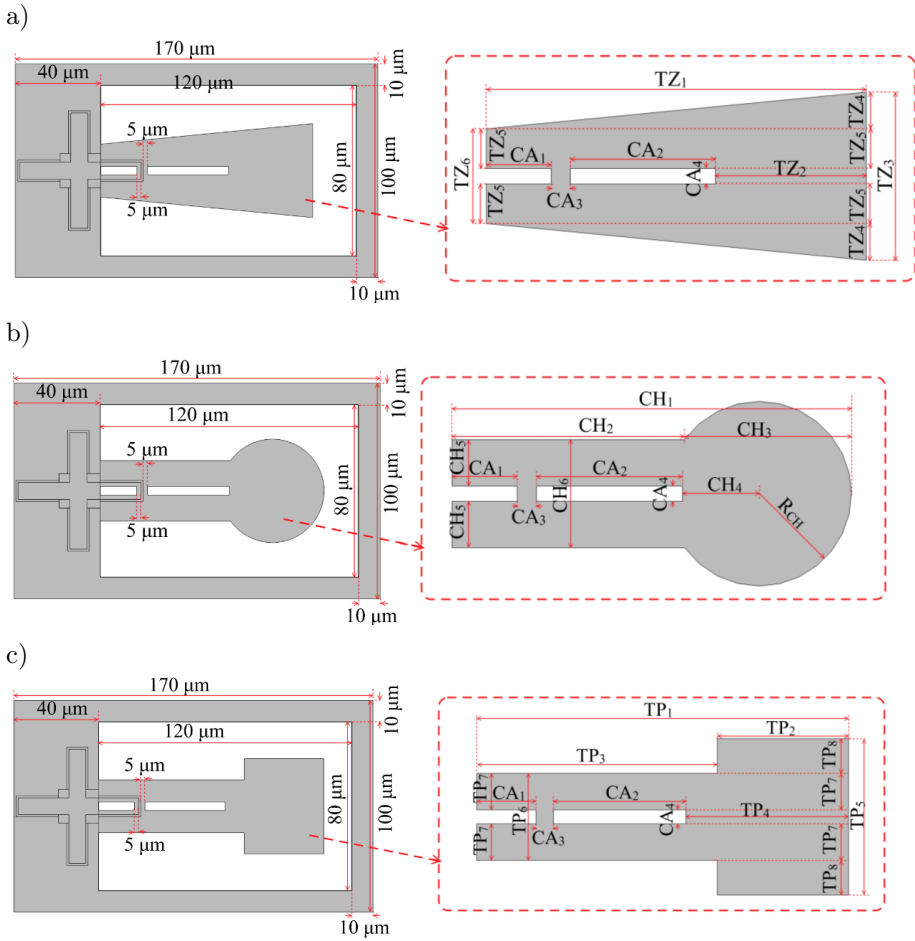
Geometrical dimension and parameters of: a) Design 1, b) Design 2, and c) Design 3.
